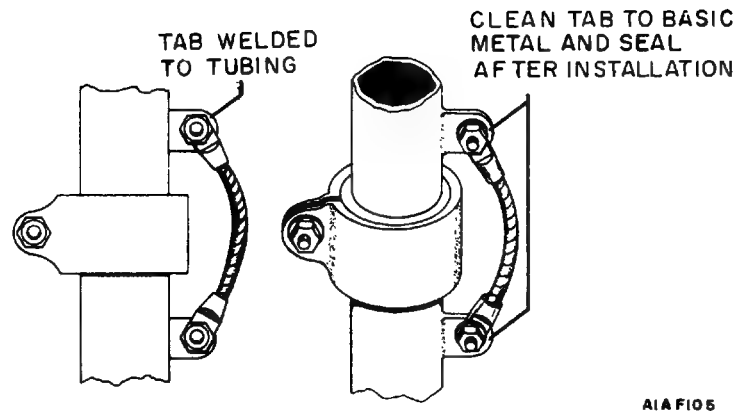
27. Typical Method of Bonding Tubing Across Clamps
